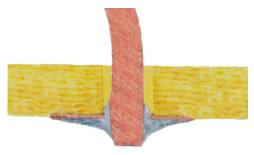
Single-Sided CCA with No Hole Support (cross-section)
